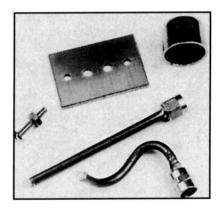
The pieces that make up a 10-GHz band-pass filter, before assembly. (photos by Kirk Kleinschmidt, NTØZ)
